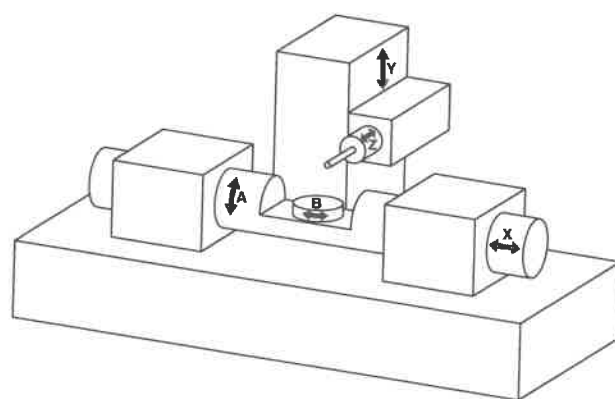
Envisioned 5-axis machine tool topology using two rotary-linear axes.
